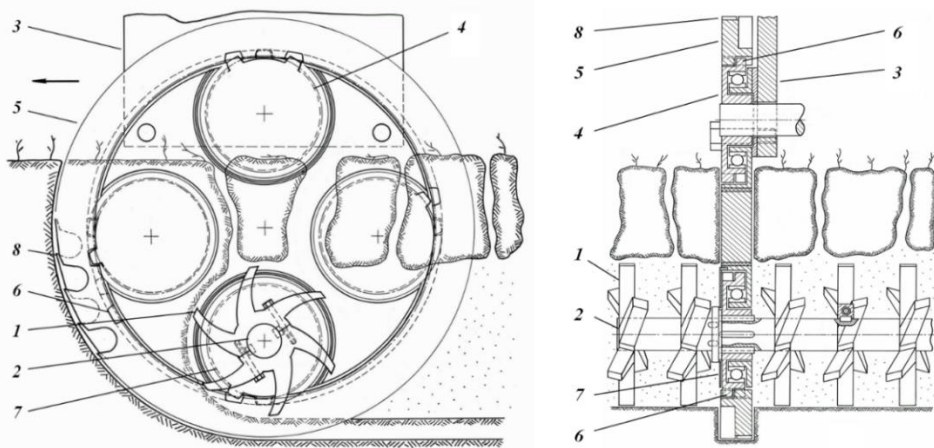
Intra-soil milling machine PMS–280, (a) side view, (b) front view
